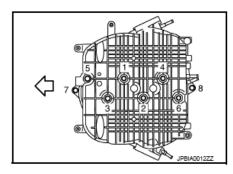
Identifying Electric Throttle Control Actuator Mounting Bolts With Tightening Sequence Courtesy of NISSAN NORTH AMERICA, INC.
